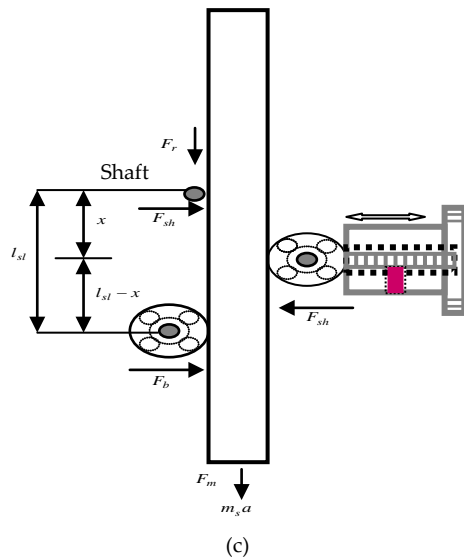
DYNAMIC USM MODELS USED TO DETERMINE THE DIMENSIONS OF THE USM PARTS AND OPTIMISE THE BEARING PRELOAD FORCE ON THE USM LINEAR STRUCTURE
